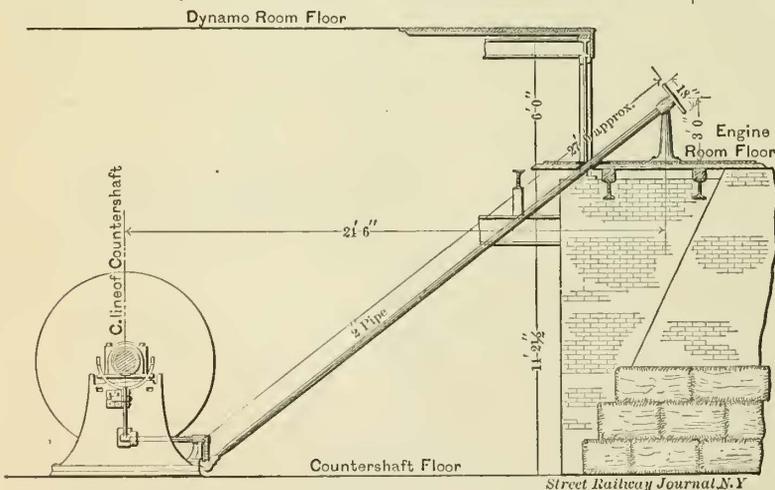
HAND WHEEL AND SHAFT FOR OPERATING CLUTCHES ON MAIN SHAFT.
